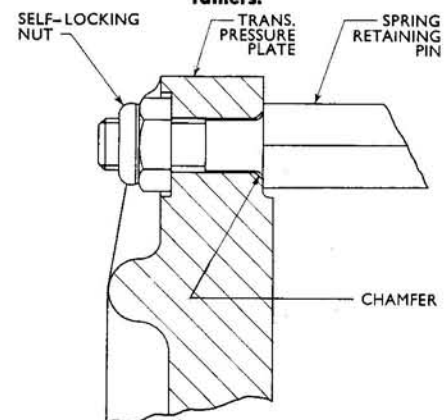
Note chamfer required in transmission clutch pressure plate to allow installation of late type spring retaining pins.
